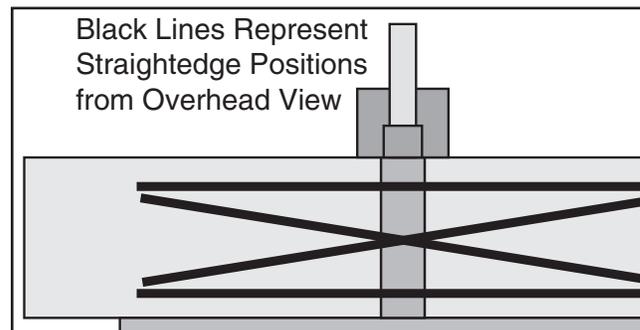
Straightedge positions for checking infeed/outfeed table parallelism.
